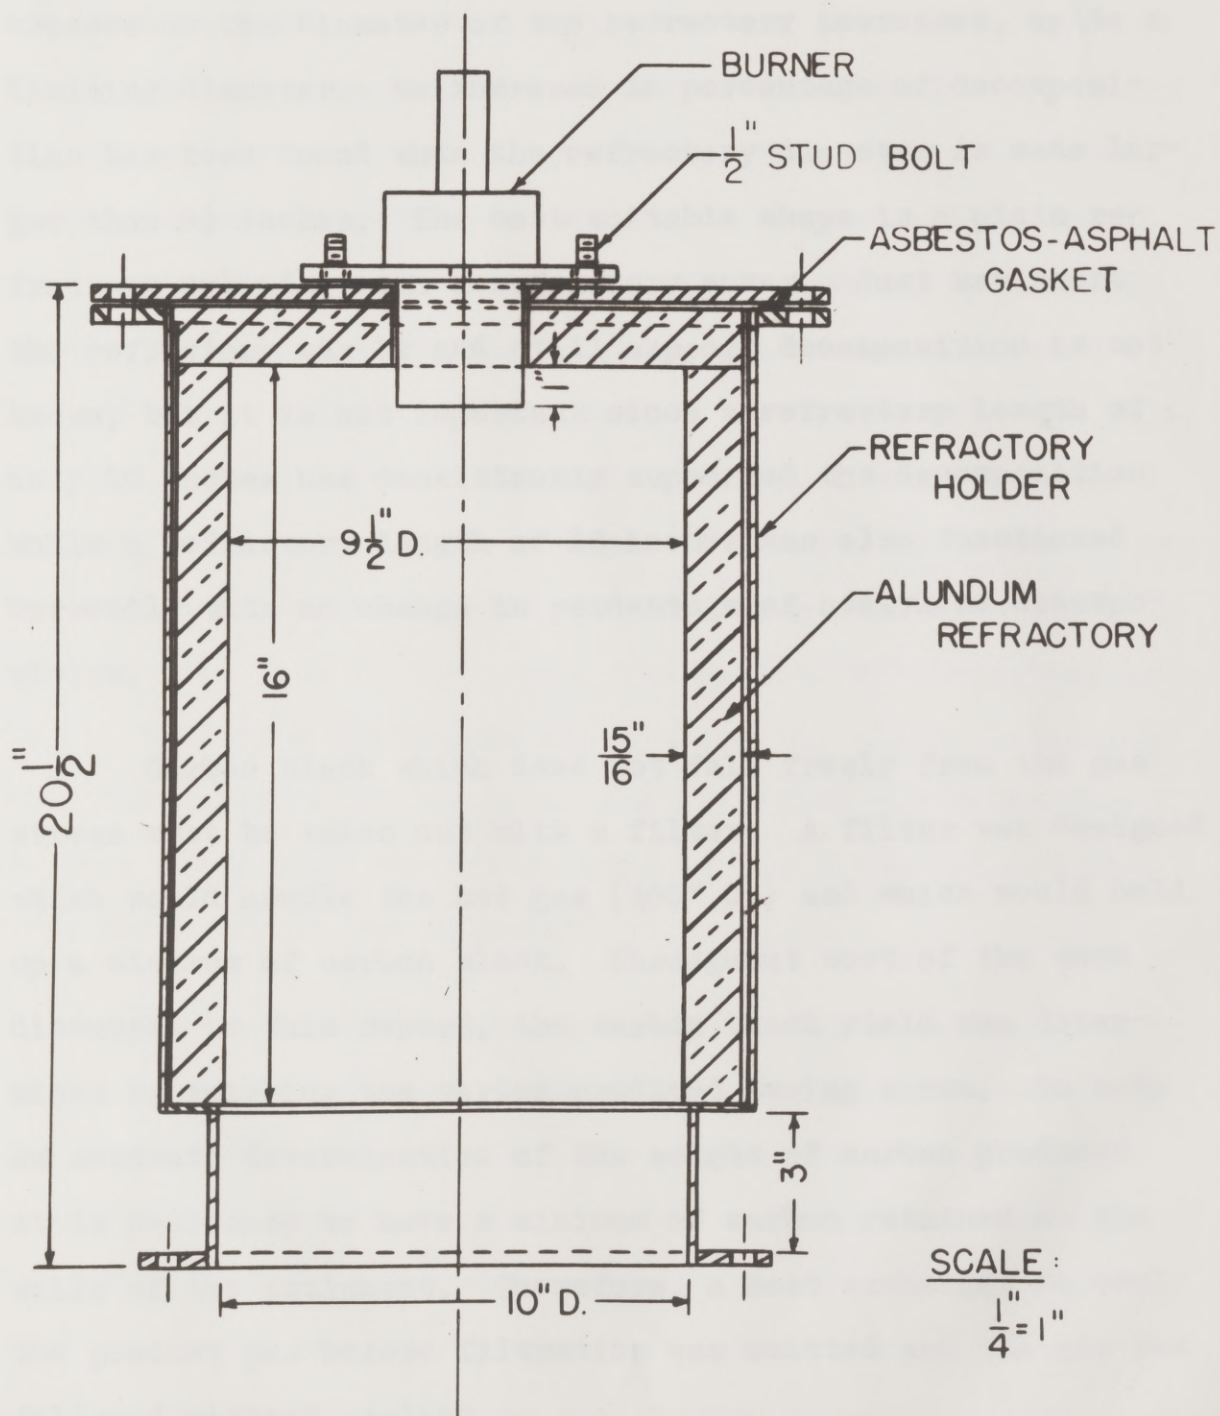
BURNER-REFRACTORY ASSEMBLY.
